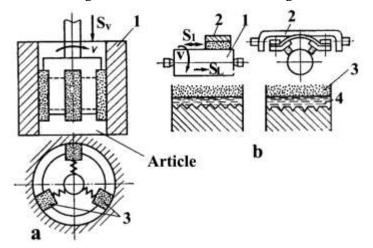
Finishing methods of machining: a – honing; b – superfinish; 1-work; 2-tool holder; 3 – abrasive tool; 4 - mineral oil
